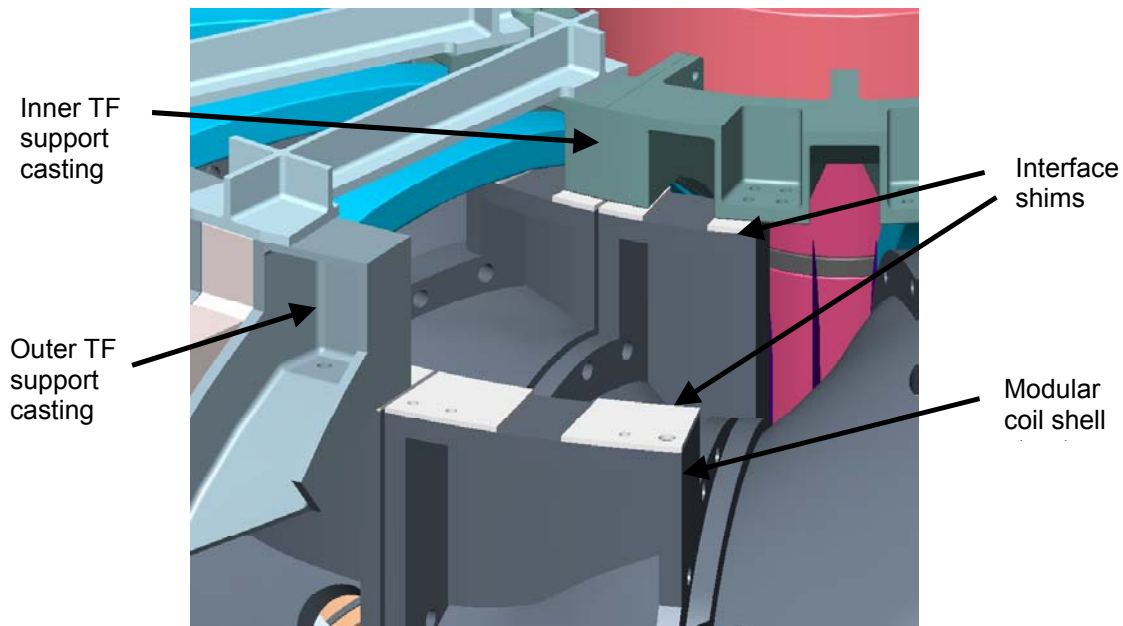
Interface Between Coil Support Structure and Modular Coil Assembly
